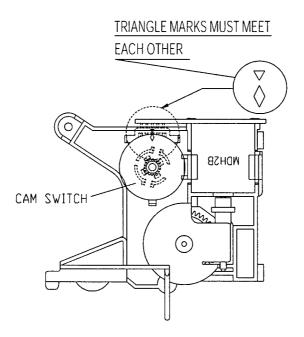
DATUM POSITION OF CAM SWITCH TRIANGULAR MARKS
